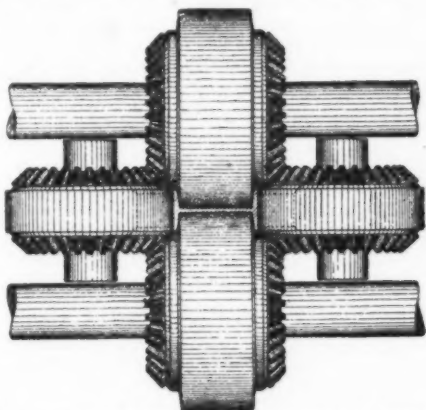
NON-REVERSING UNIVERSAL MILL
